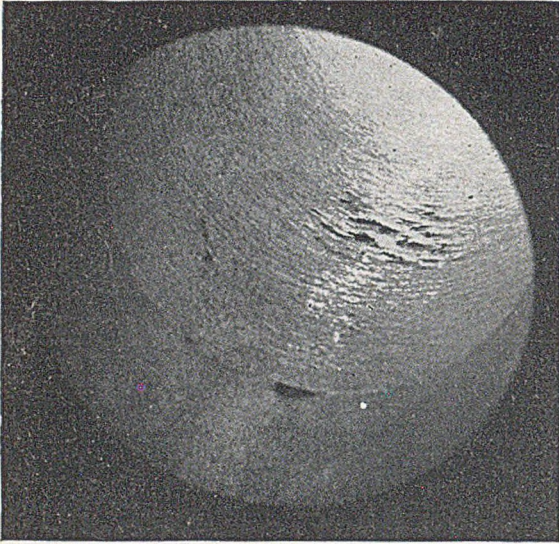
First Method used for Feeding the Tube-testing Cylinder Casting; and FIG. 18, the Porosity revealed in the Bore on machining.
